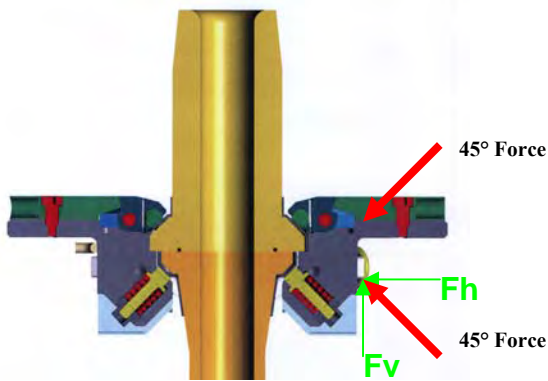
Cassette – Monobloc inner nozzle support and submerged entry nozzle-plate spring-pushers device
